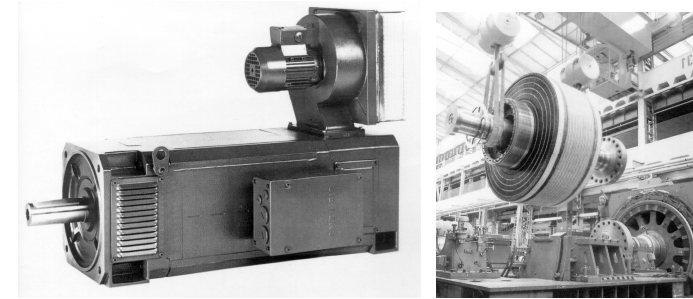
Separately excited dc machines: left: four pole machine with additional external fan, right: 2 x 12 MW-mill drive in “tandem”: Mounting of the rotor of the first machine, the second machine behind is already completed.
